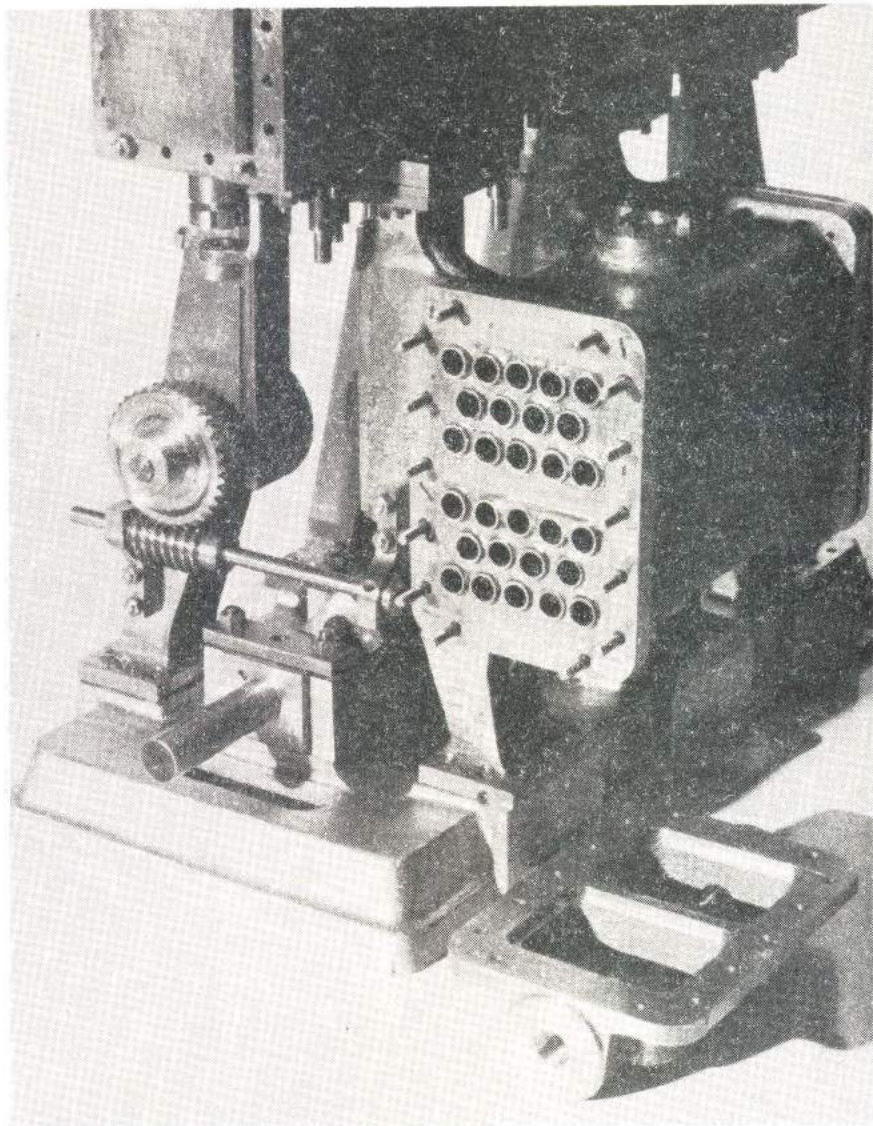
The engine is shown here part-assembled, the integral condenser can be seen, the cover has not yet been fitted and is by the bedplate of the engine. Note also the embryonic reversing gear.
